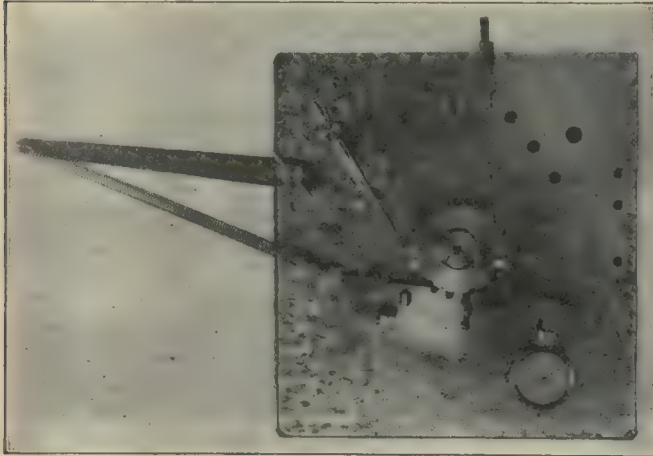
"KAVLE" CORRECT INVOLUTE INDICATOR
